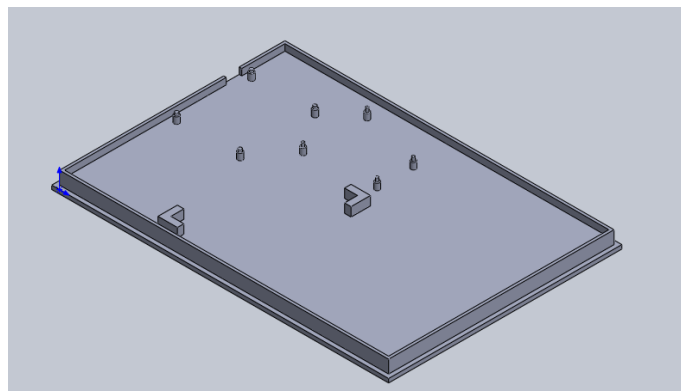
Bottom piece of device case in SolidWorks with mounting for Arduino, Raspberry Pi, and breadboard.
